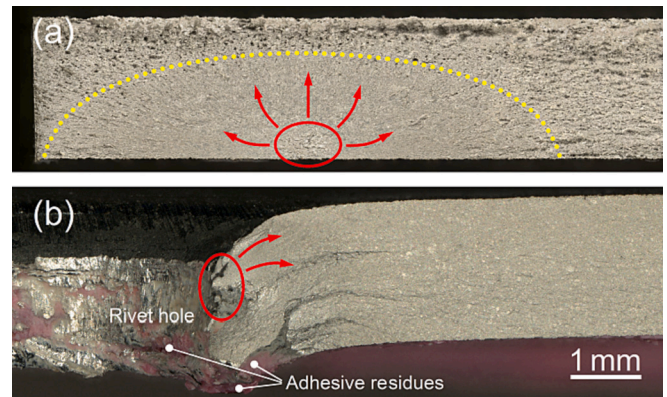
Details of the fracture surfaces of two samples showing fatigue crack initiation (a) on the surface of the magnesium alloy sheet and (b) at the rivet hole of the magnesium alloy sheet. The viewing direction is parallel to the loading direction, as marked with the yellow arrows in Fig. 8.
